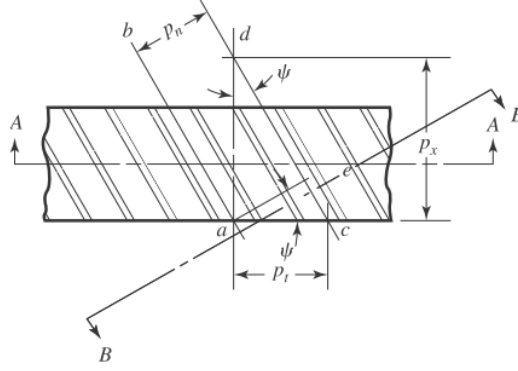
Axial pitch (p_x) of helical gears [53]
